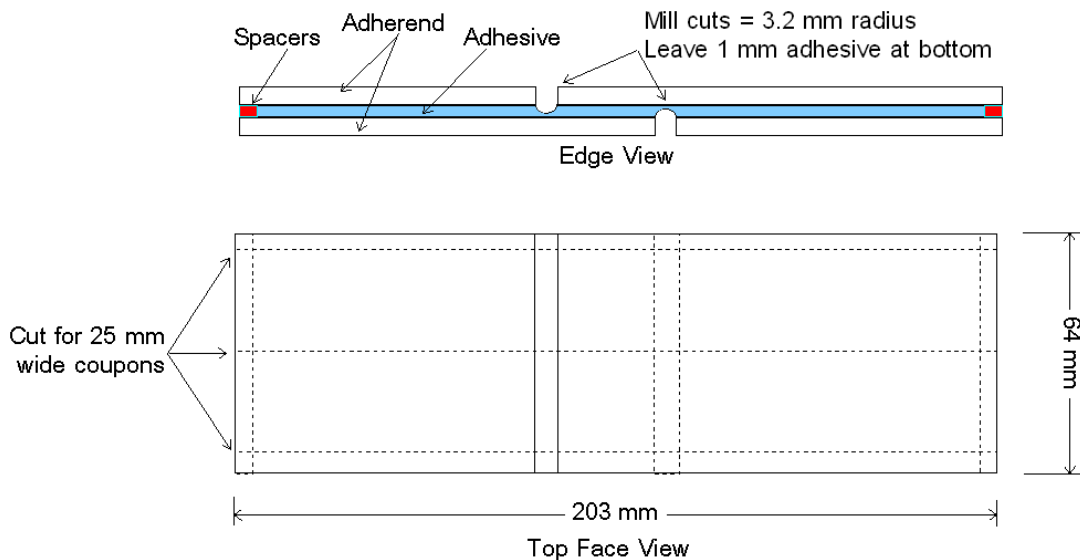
Lay-out of lap-shear adhesive panel (two specimens/panel).
